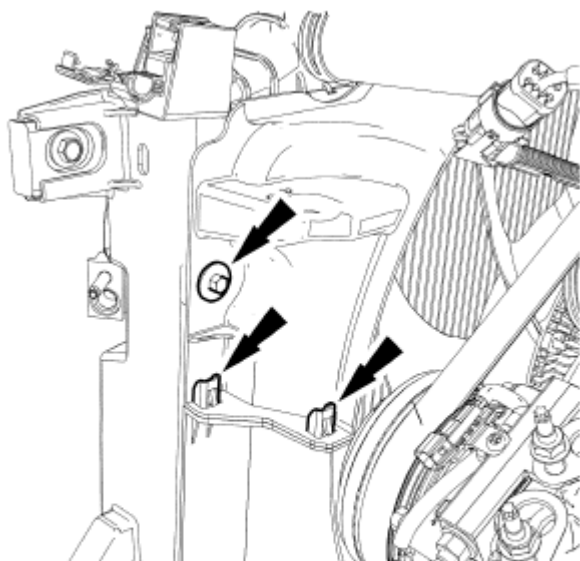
Locating Coolant Overflow Hose, Bolts And Coolant Expansion Tank
